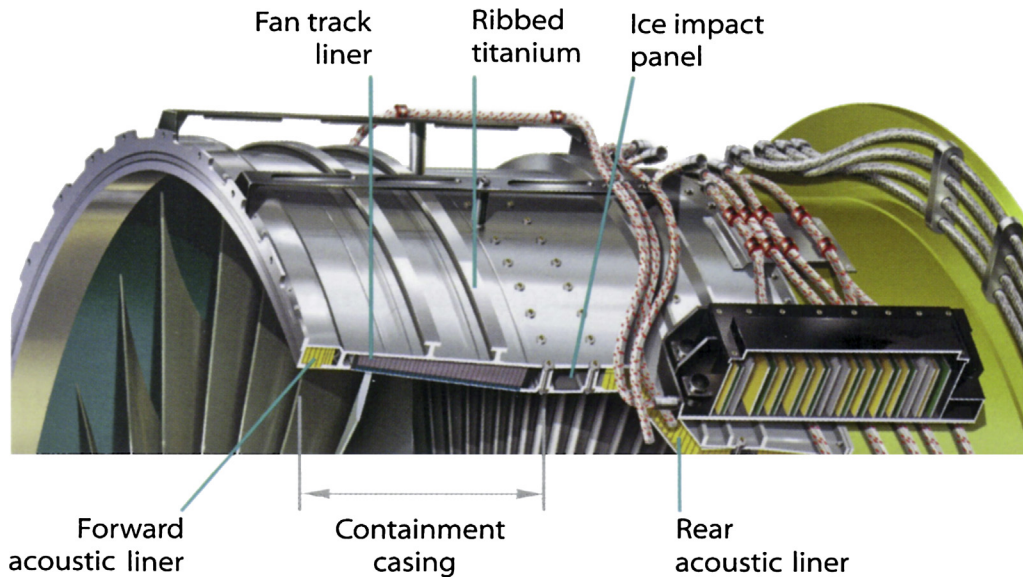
Section through a Trent 500 fan casing. This casing mounts the engine accessories, minimizes fan noise impact, and must contain a fan blade during a blade-off event. (Source: Rolls Royce.)
